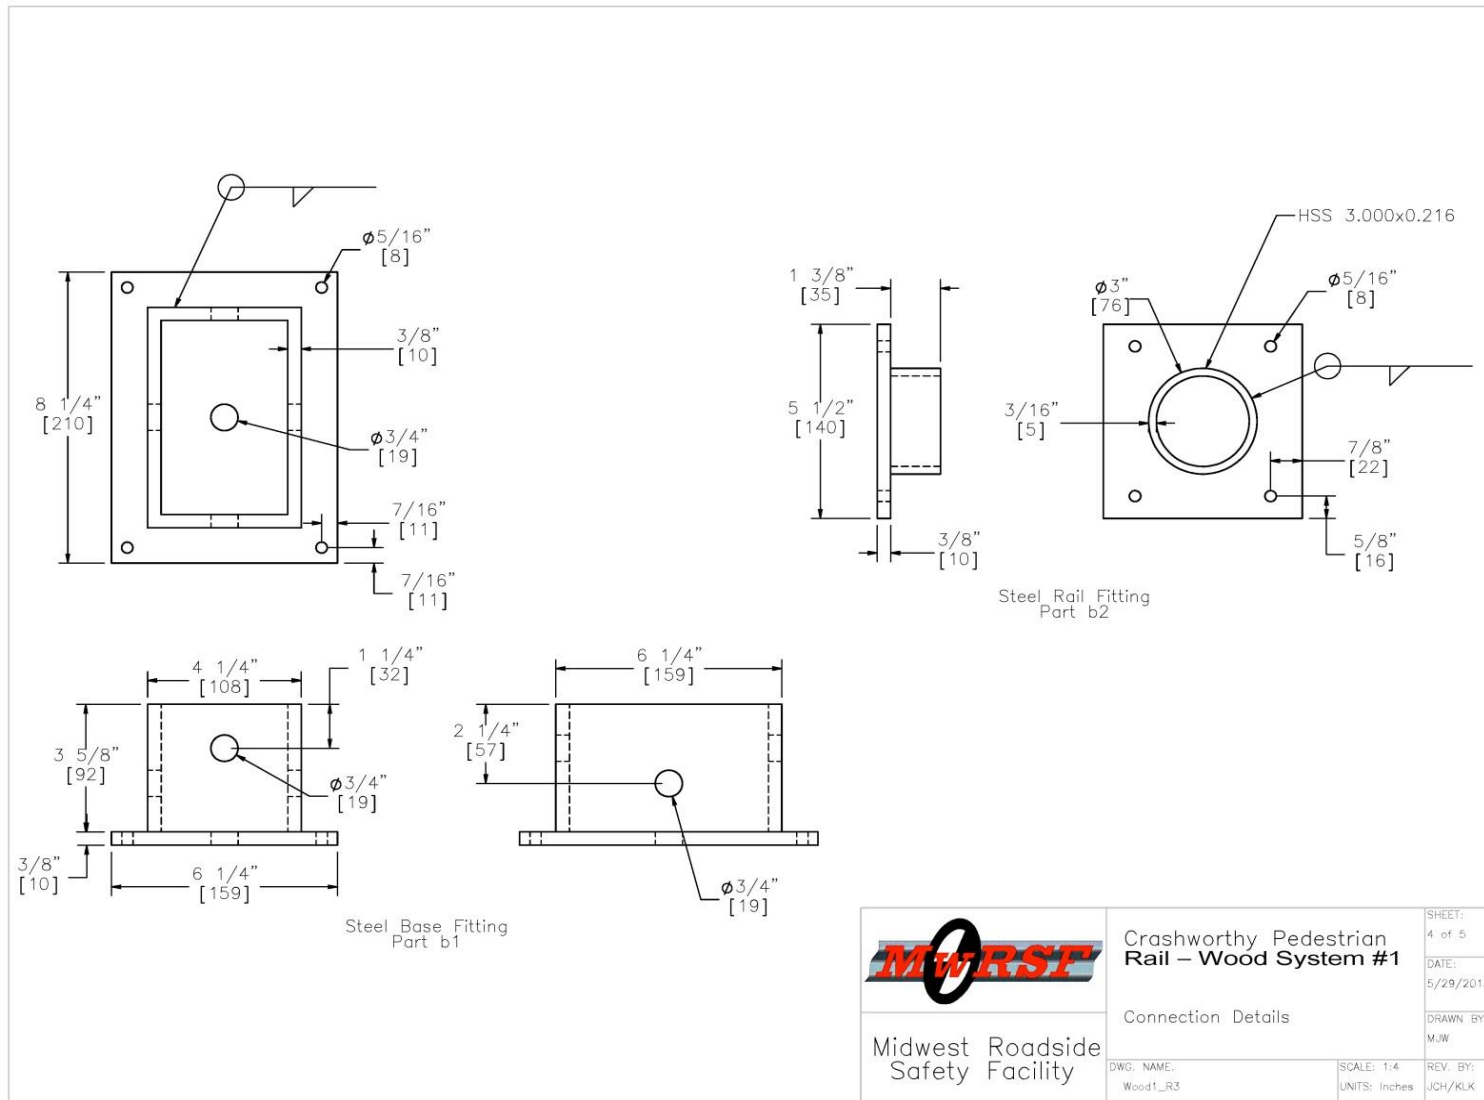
Modular Wood Rail, Design Concept WOOD1 (Sheet 4 of 5)
